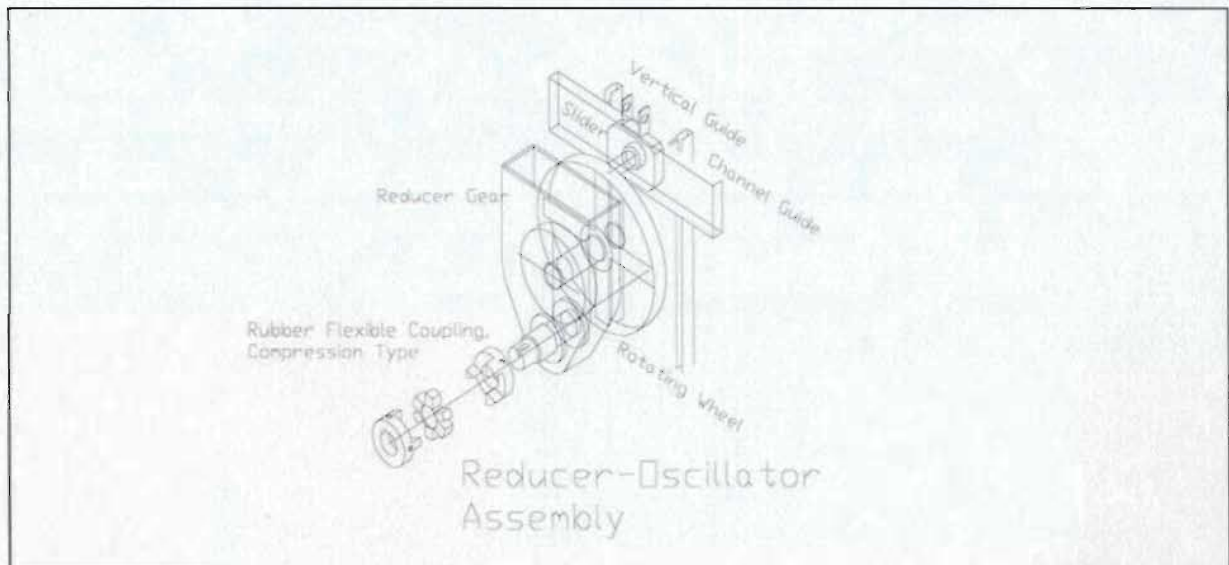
10 Installation assembly of coupling, reducer gear, and oscillator mechanism
